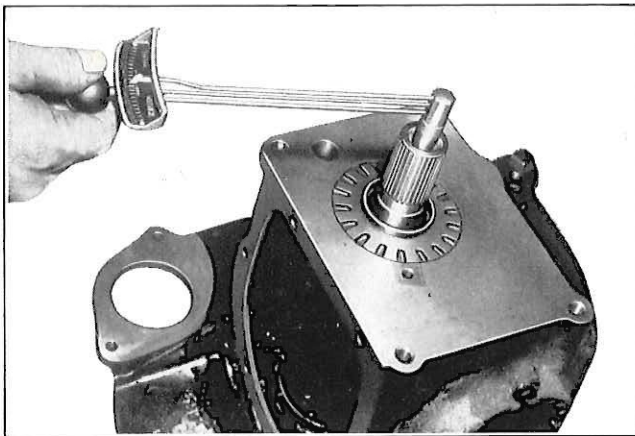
Measuring Pinion Turning Torque Using J-8362 Adapter and Torque Wrench J-5853
